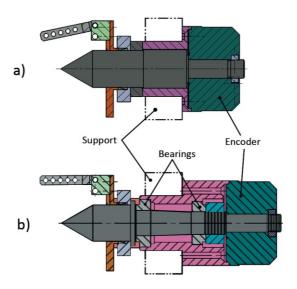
Example of a redesigned drive spindle: a) Initial design without bearings; b)
